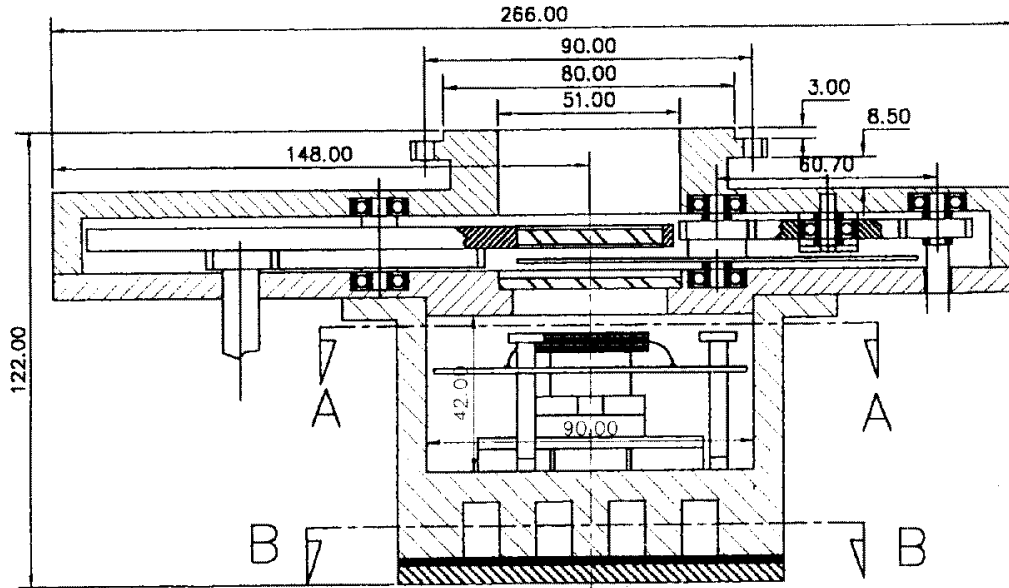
A drawing of the first prototype version of the Tromsø CCD photometer, showing a vertical section through the camera head mounted on the filter and shutter unit. Horizontal sections through points A-A and B-B are shown in Fig. 2.4.
